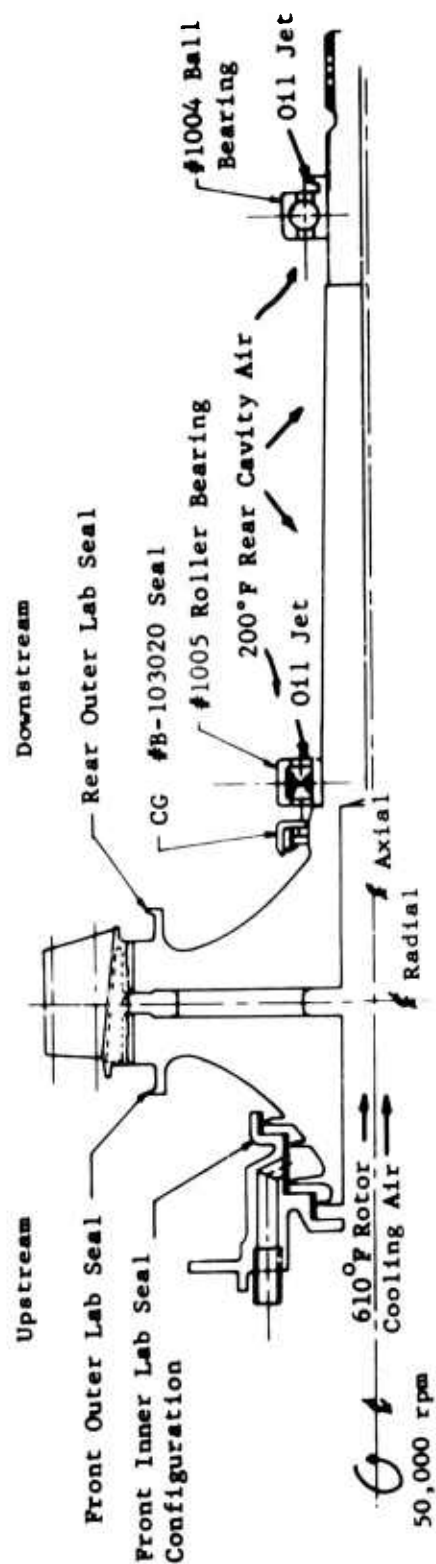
Turbine Test Rig - Rotor Blade Disc Assembly.
